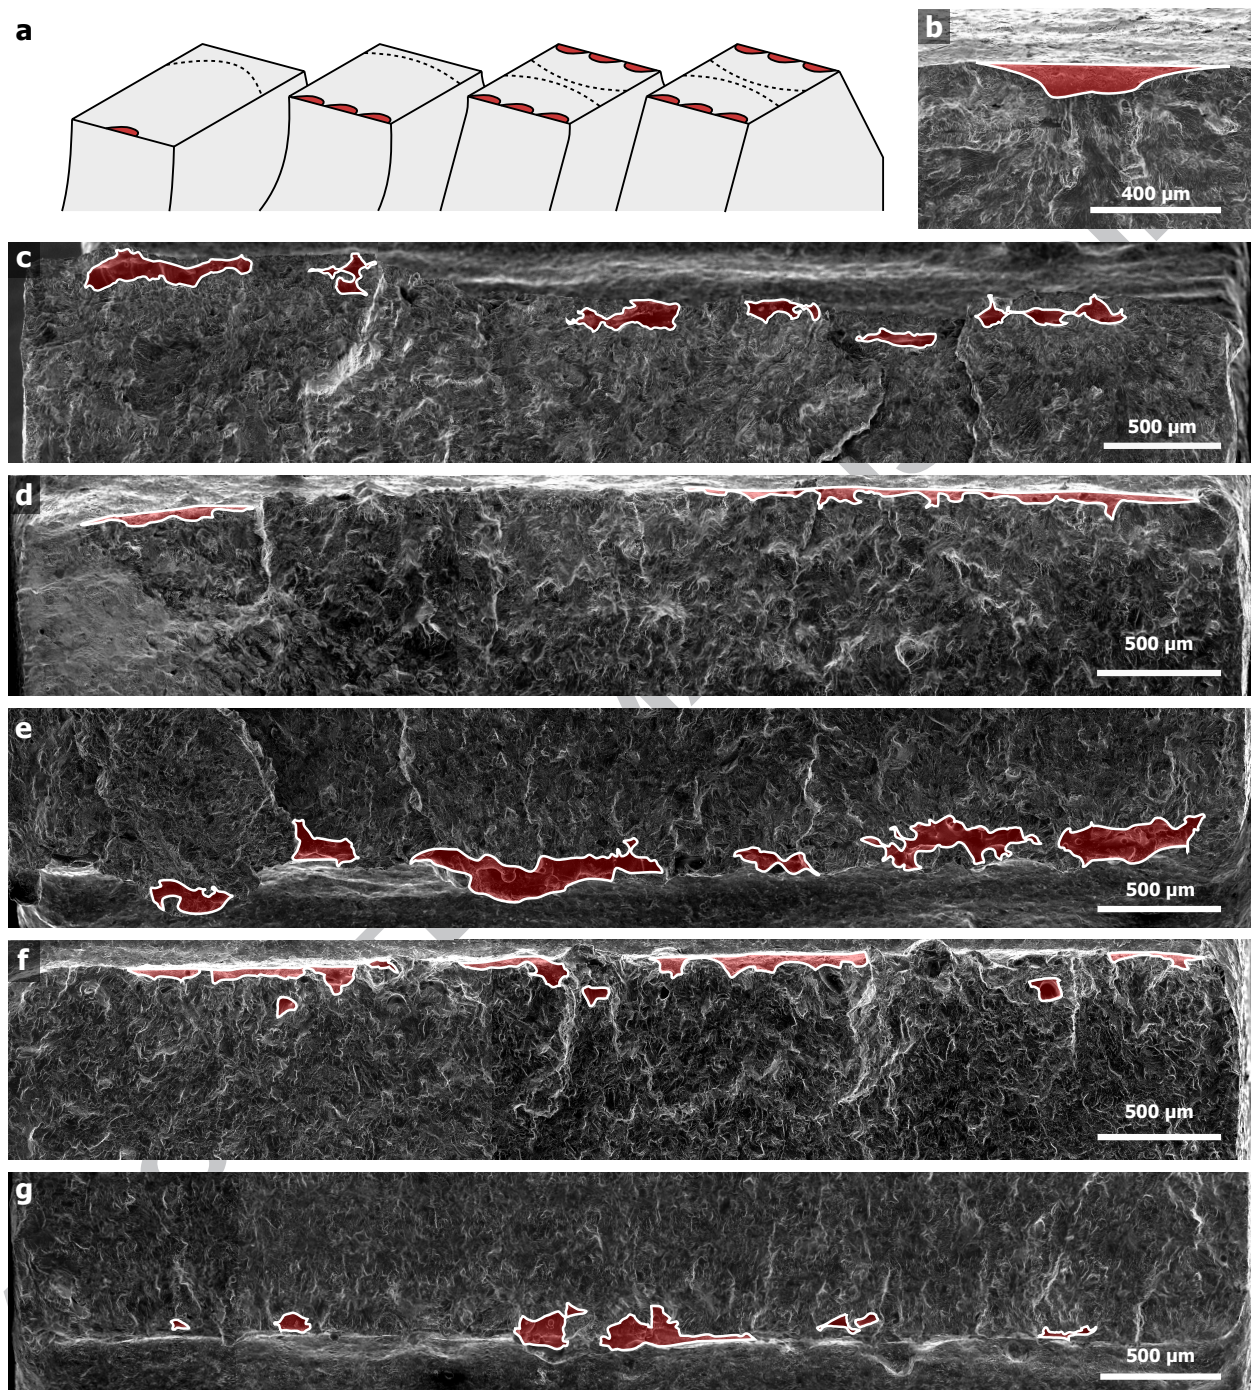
(a) Schematic illustration of fracture surface of unnotched, semi-circular, and v-notch specimens. Fractography of defects in specimens: (b) unnotched; (c) semi-circular; (d, e) v-notch radius 1 mm; (f, g) v-notch radius 0.1 mm.
